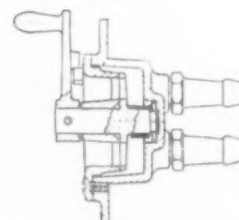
ALTITUDE-CONTROL-VALVE ASSEMBLY
